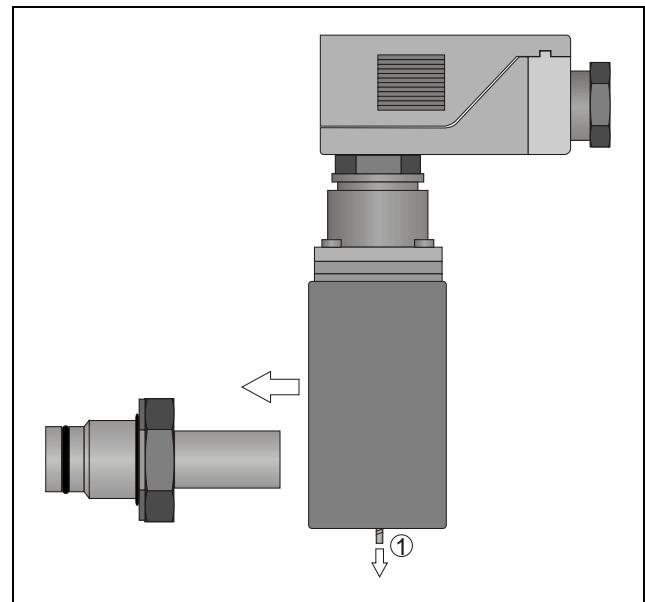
Detaching the electrical indicator from the mechanical lower part
